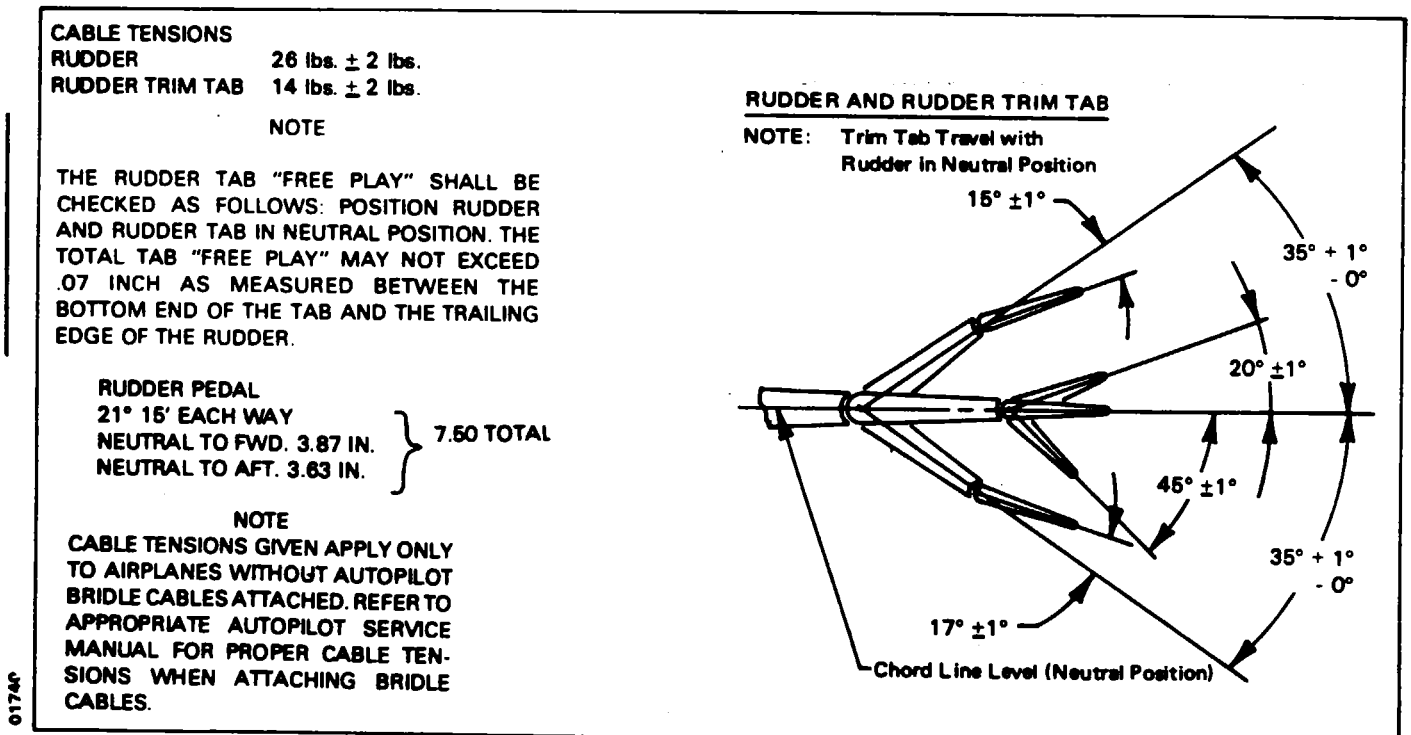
Rudder and Trim Tab Control Travels and Cable Tensions
